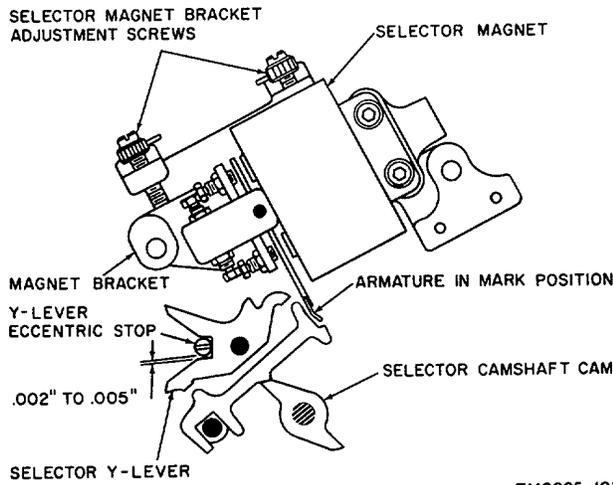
Selector and stop levers alignment with armature (preliminary adjustment) (TT-76A/GGC and later models).
